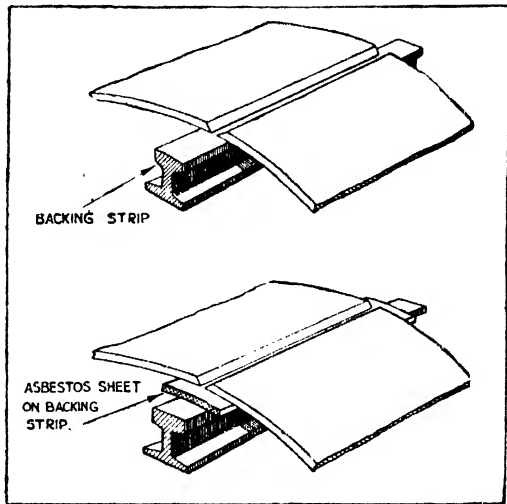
METHOD OF SUPPORTING A COPPER WELD
